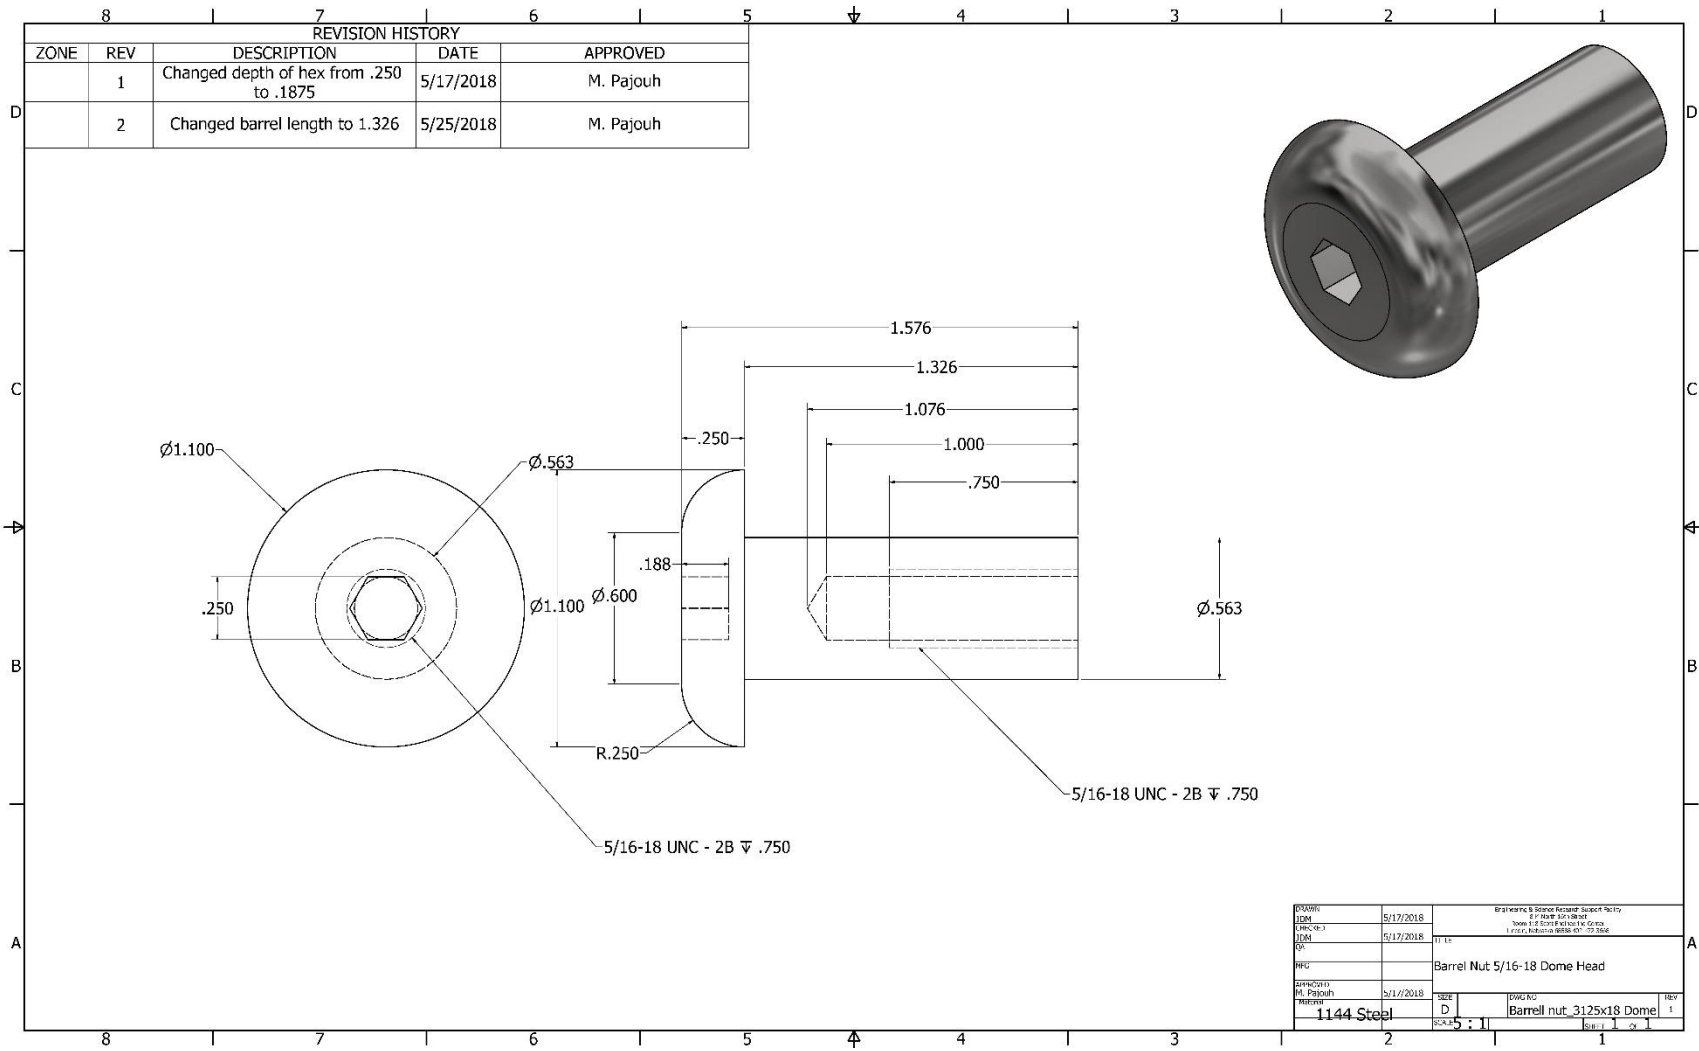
1.576-in. (40-mm) Long Barrel Nut with Dome Head Design
